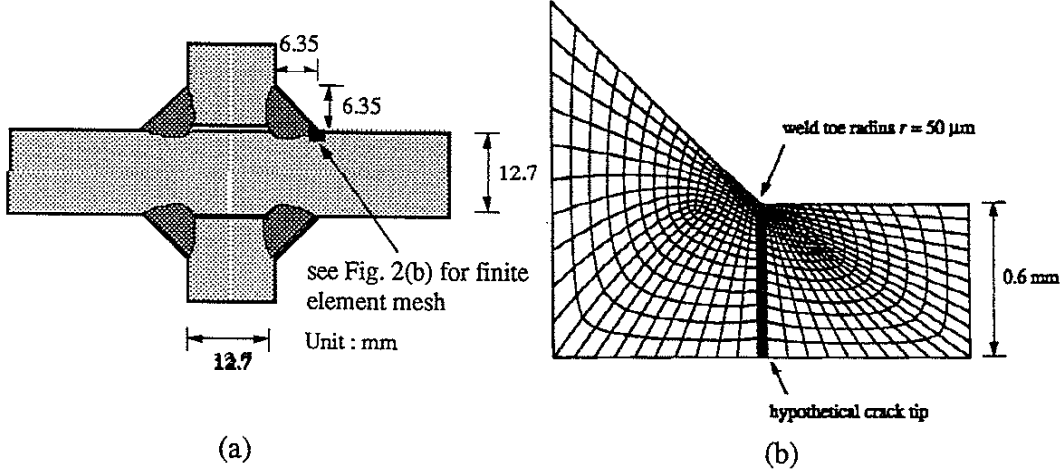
The stress-relieved weld. (a) The geometry of the cruciform weldment. (b) The finite element mesh around the weld toe.
